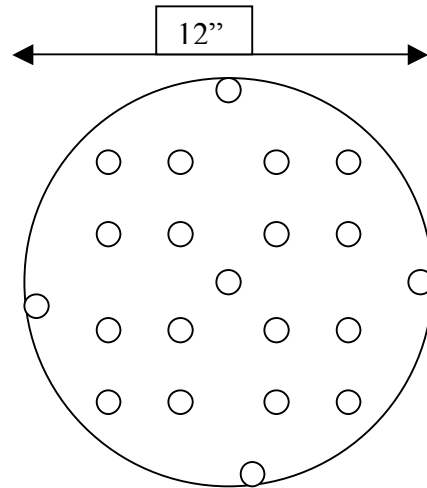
Pattern of holes (1/8 inch in test bucket bottom)
